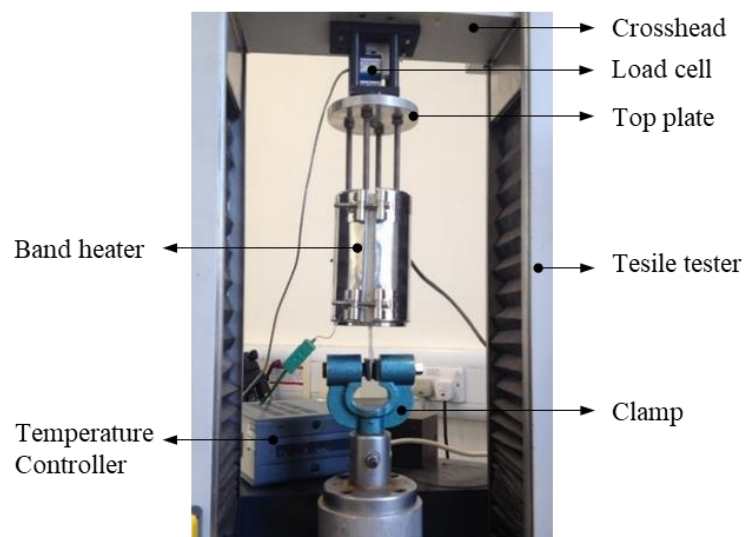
Photo of the die-drawing system (the thermometer is not shown).
